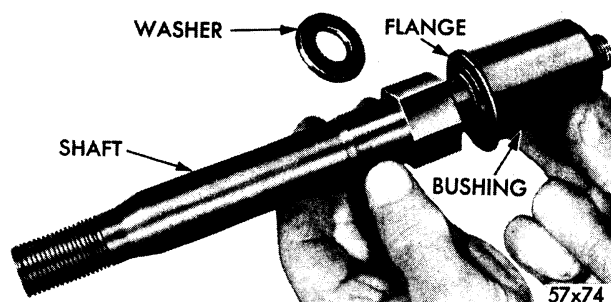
Removing or Installing Lower Control Arm Pivot Shaft Bushing
